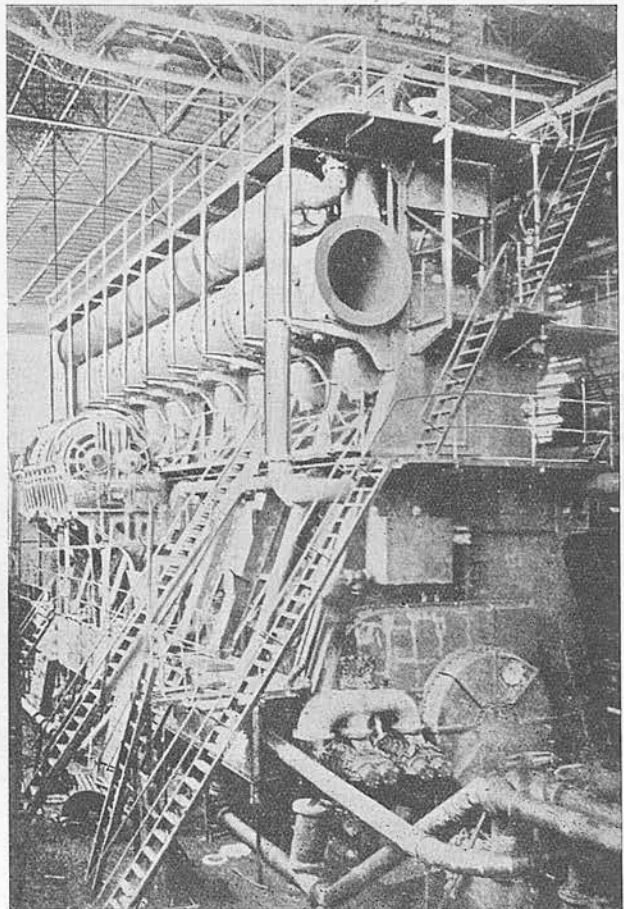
B. & W. 22,500-h.p. oil engine.
